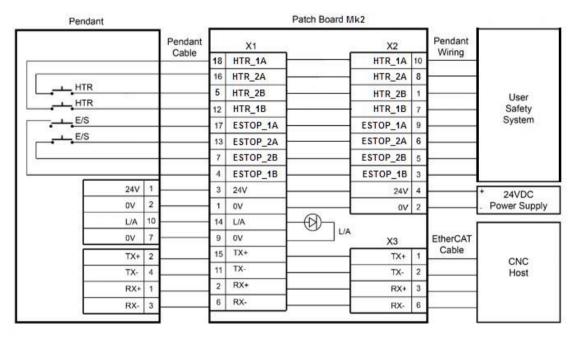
Wiring of the Remote Pendant Patch Board Mk2
